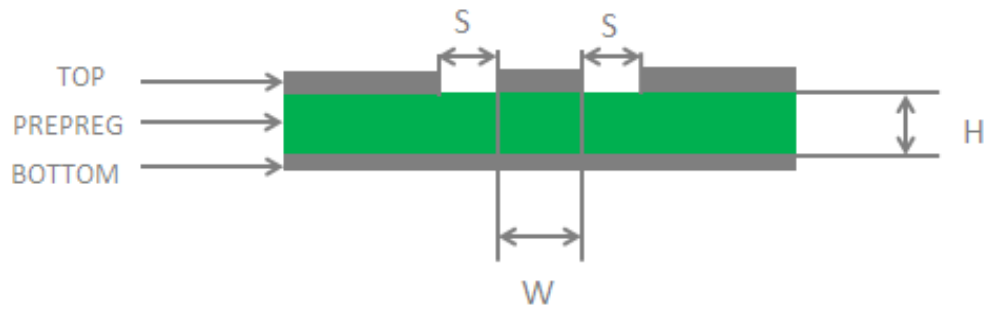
Coplanar Waveguide Design on a 2-layer PCB
